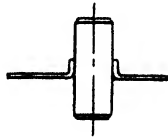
Extruded hole for a pin, bolt, stud, shaft, or bushing.
